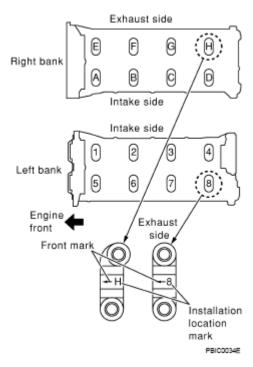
Locating Installation Location Mark Of Left Exhaust Bank Courtesy of NISSAN MOTOR CO., U.S.A.
